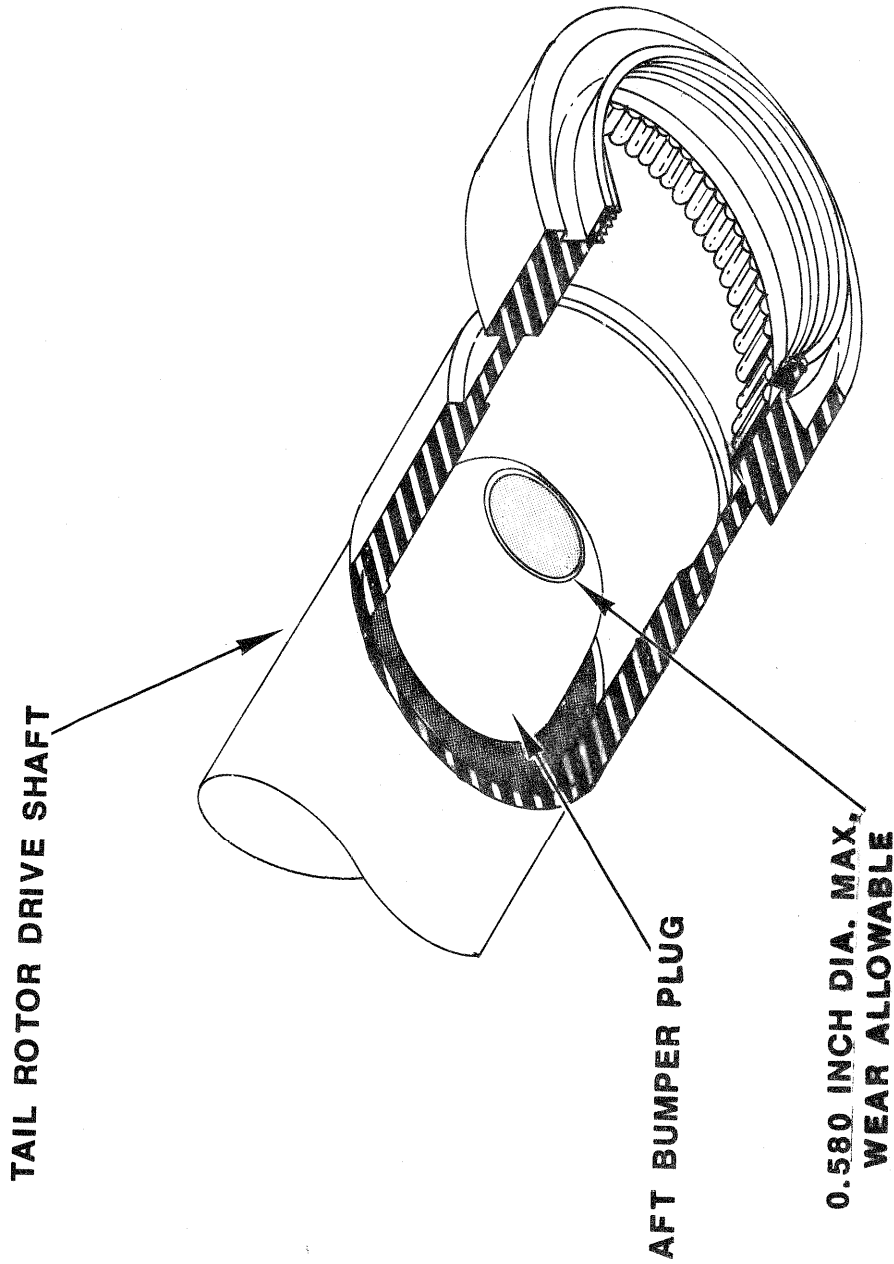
TAIL ROTOR DRIVE SHAFT AFT BUMPER PLUG
